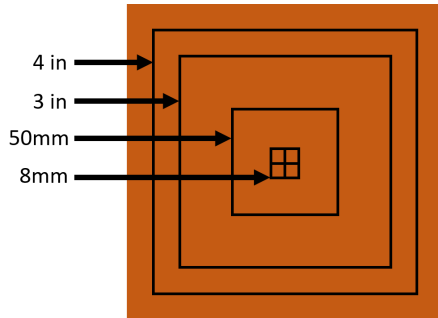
The default chuck vacuum tool presents several square vacuum patterns.
